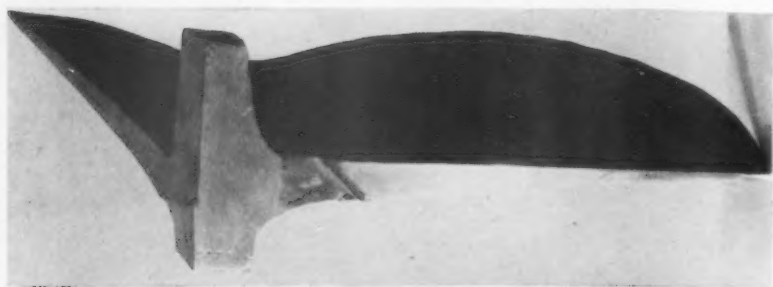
A SECTIONAL VIEW OF THE CENTRIFUGALLY CAST STEEL PROPELLERS SHOWN IN FIG. 21.
